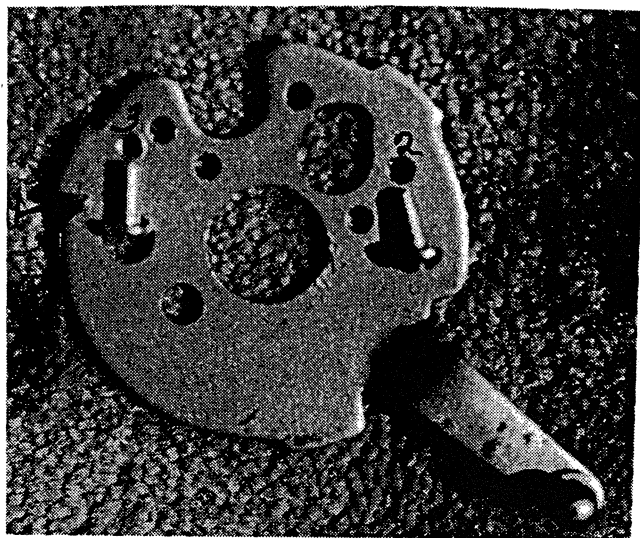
Cleaned upper plate. 1 - Roll pin is set in position. Screws point to holes for mounting new points and "CHIP" assembly. Hole #2 is an existing hole & #3 is new. Drill & tap #2 & #3 for 8/32 screws.
